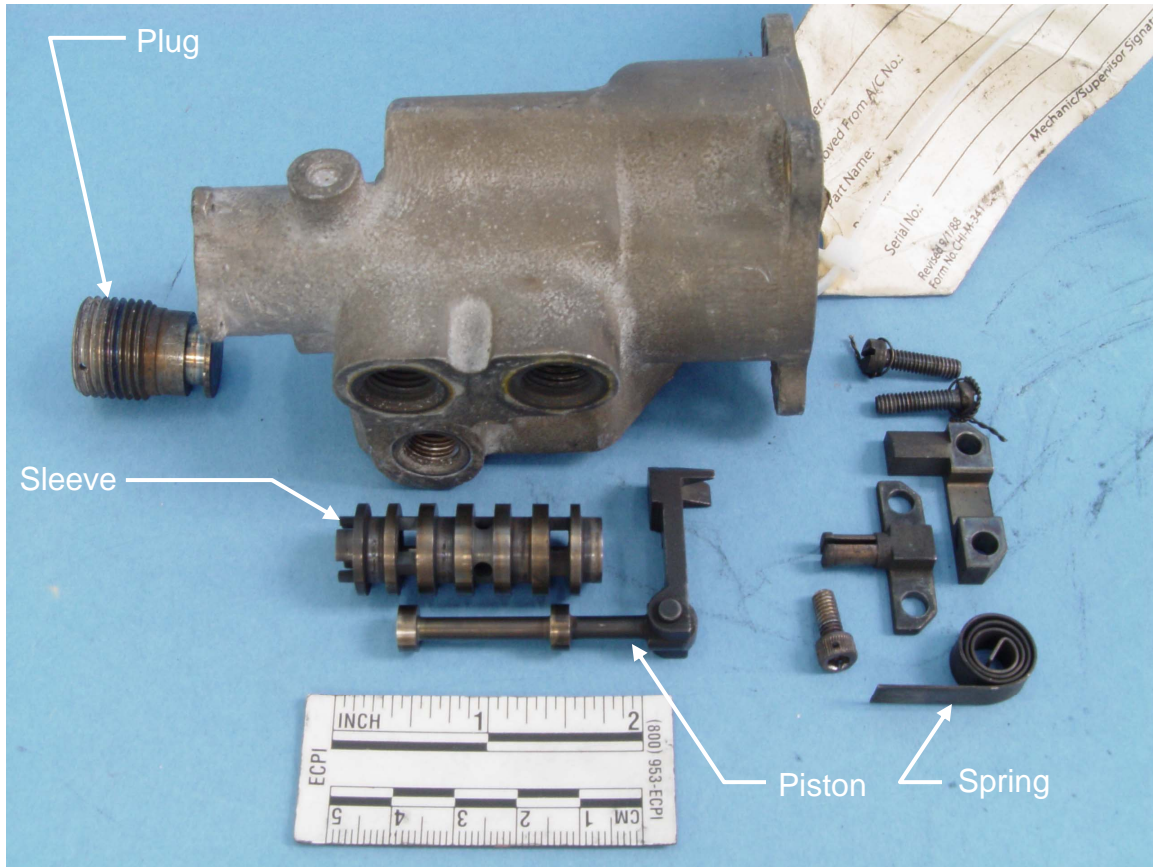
Number 1 engine pilot valve assembly after disassembly.
